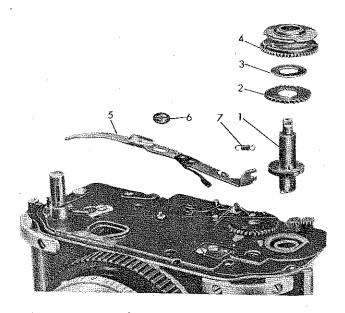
Parts on Mechanism Plate, Exploded from Camera
